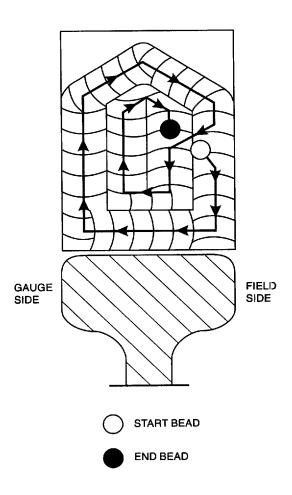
Typical Weld Pattern for Rail End Repair
